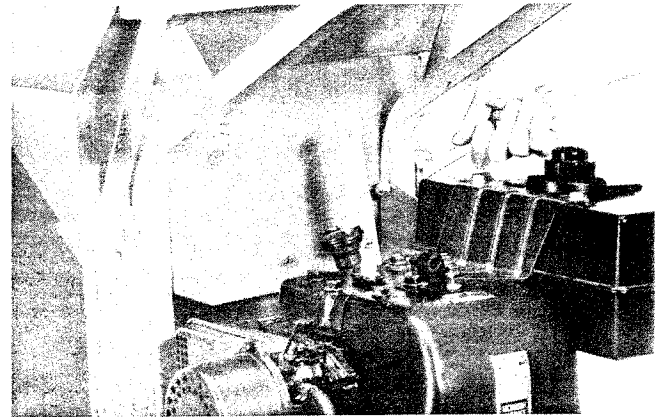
Position the 8HP Briggs & Stratton Clutch Arm Guide-Plate as above. Plate holes nearest engine go over the two vertical engine studs. Secure the guide-plate to the studs with two locknuts. Other end of guide-plate will be connected later to handlebar.
